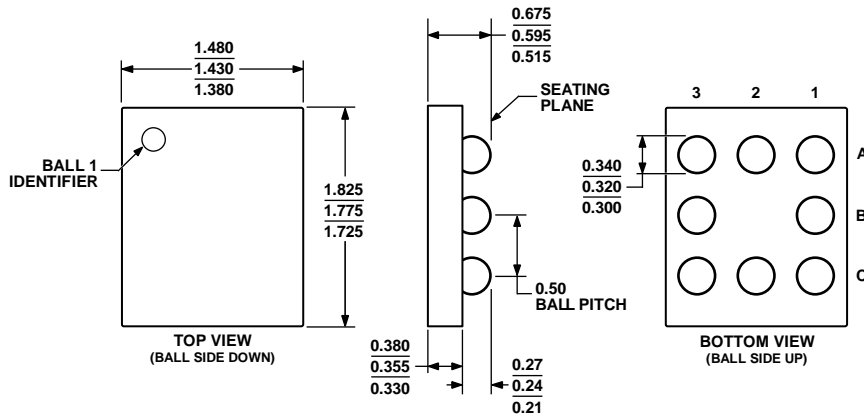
8-Ball Wafer Level Chip Scale Package [WLCSP] (CB-8-1)
